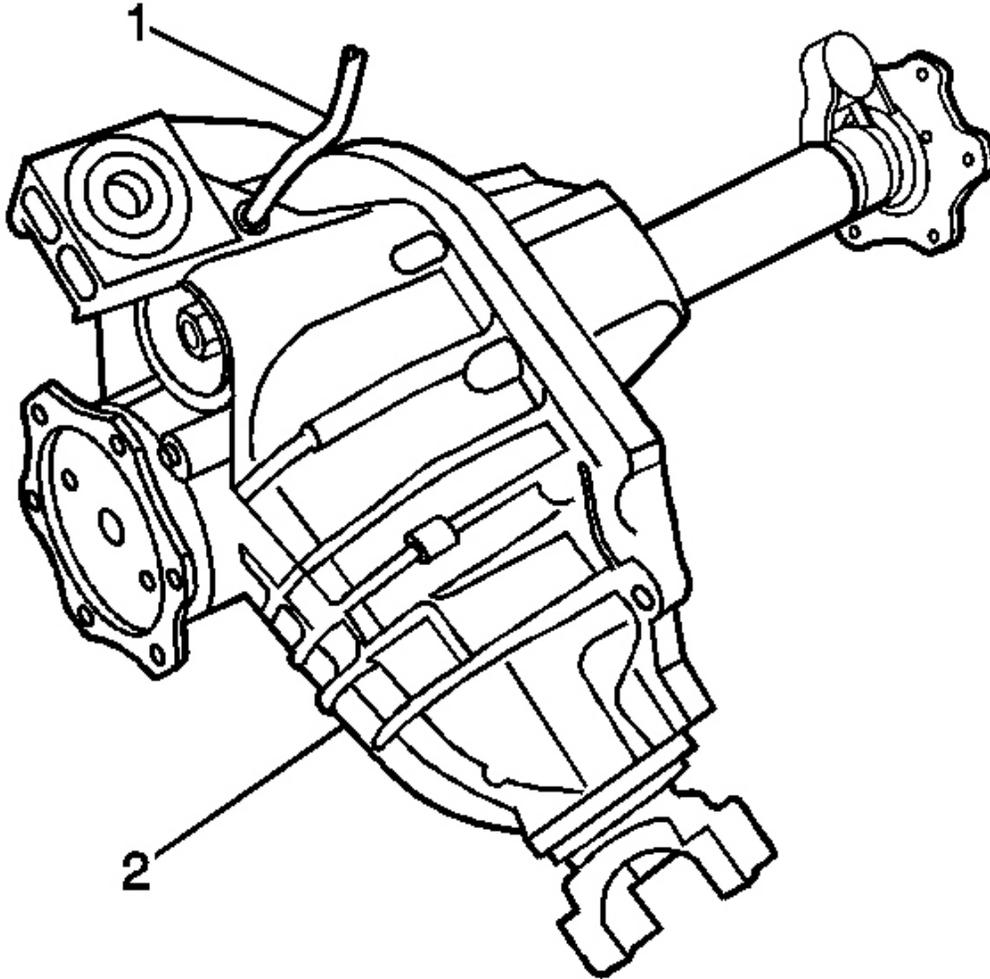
Identifying Vent Hose & Differential Carrier Case Assembly
